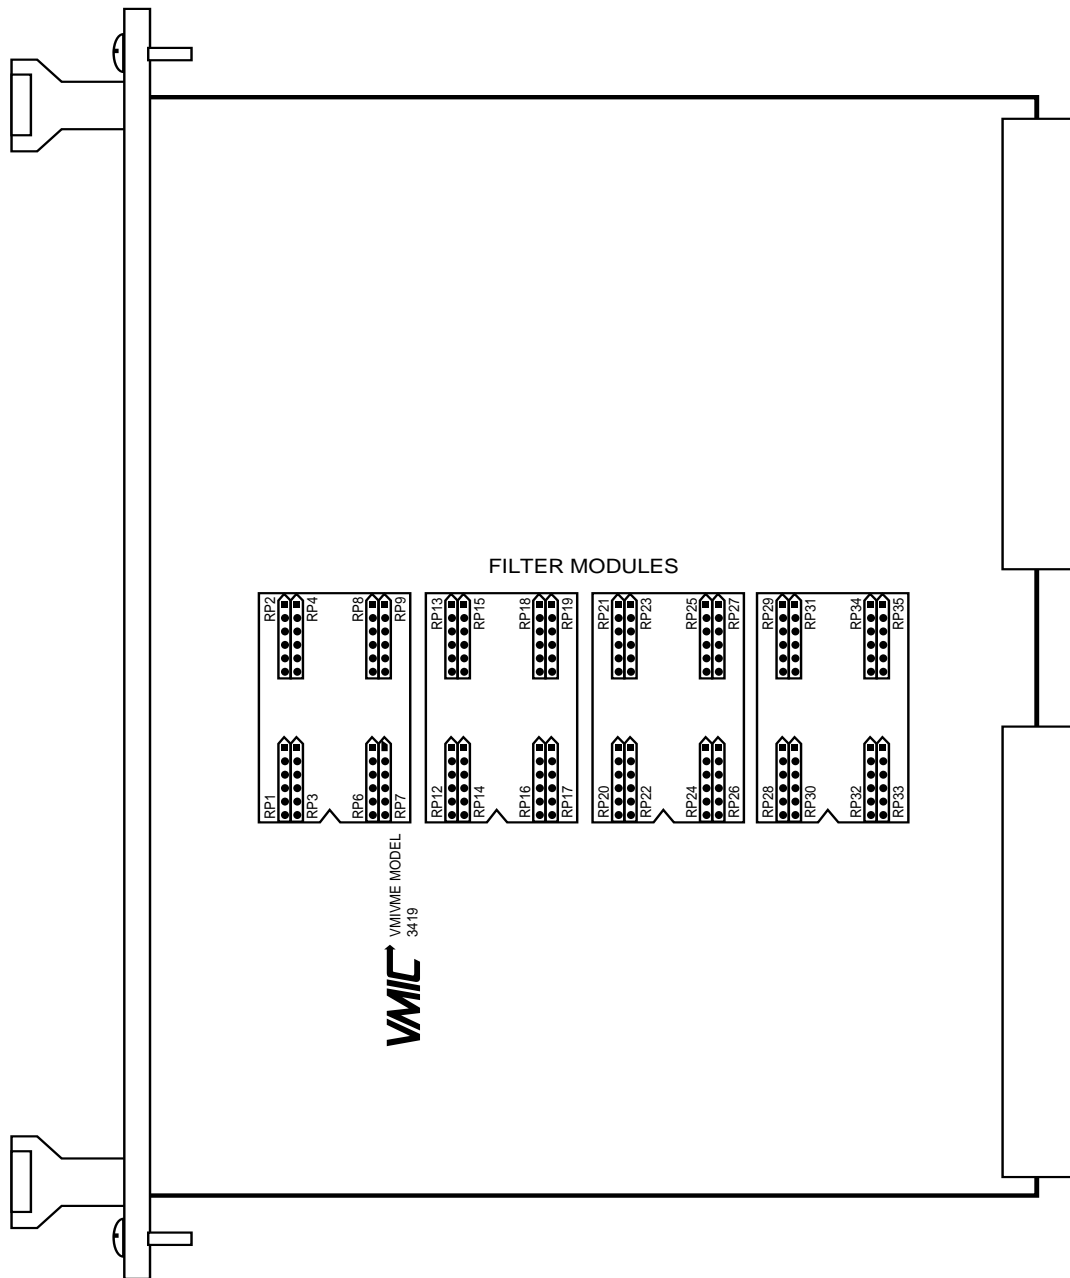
Location of the Filter Modules on the VMIVME-3419 Board
